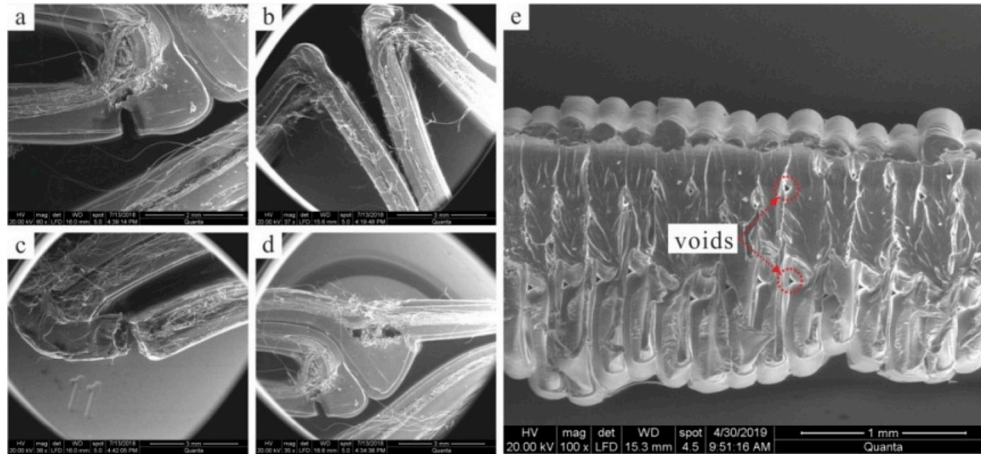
SEM images showing various damage types: (a) crack, (b) delamination, (c) fracture, and (d) void in CFRTPC auxetic honeycomb after test; (e) cross-sectional morphology of fractured struts in pure PLA auxetic honeycomb after test.
